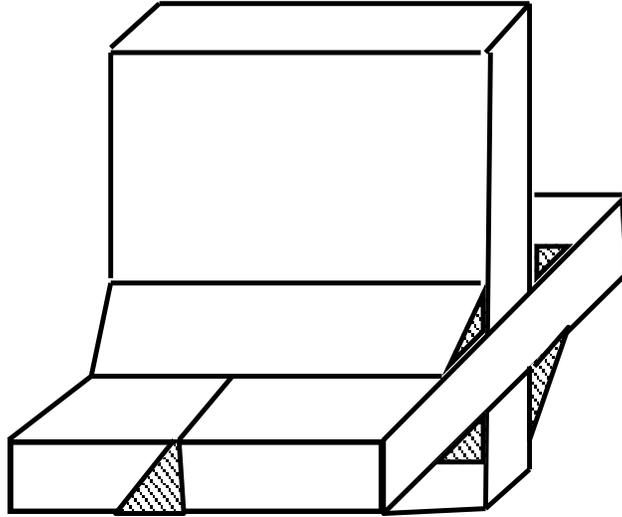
A combined weld is a mixture of fillet and butt welds.
